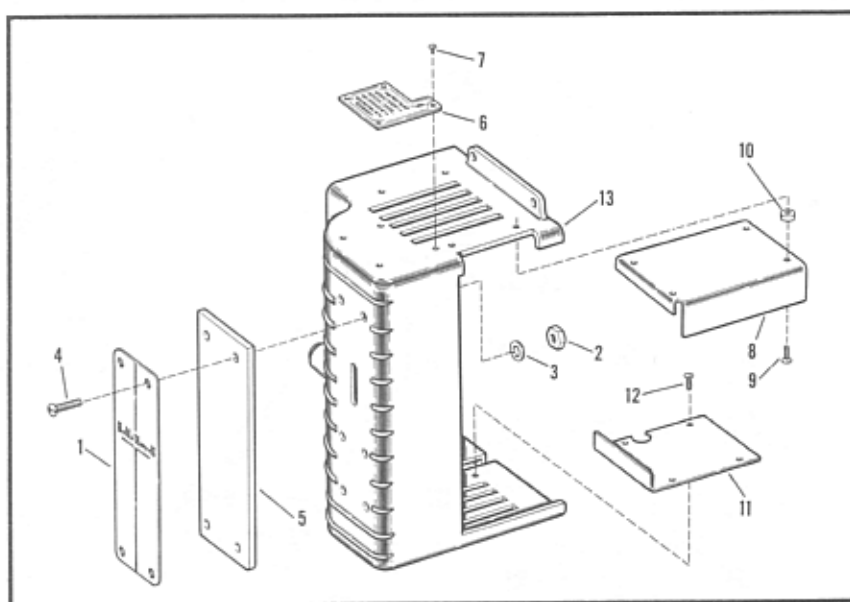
Removing Shutter and Shuttle Mechanism Parts
